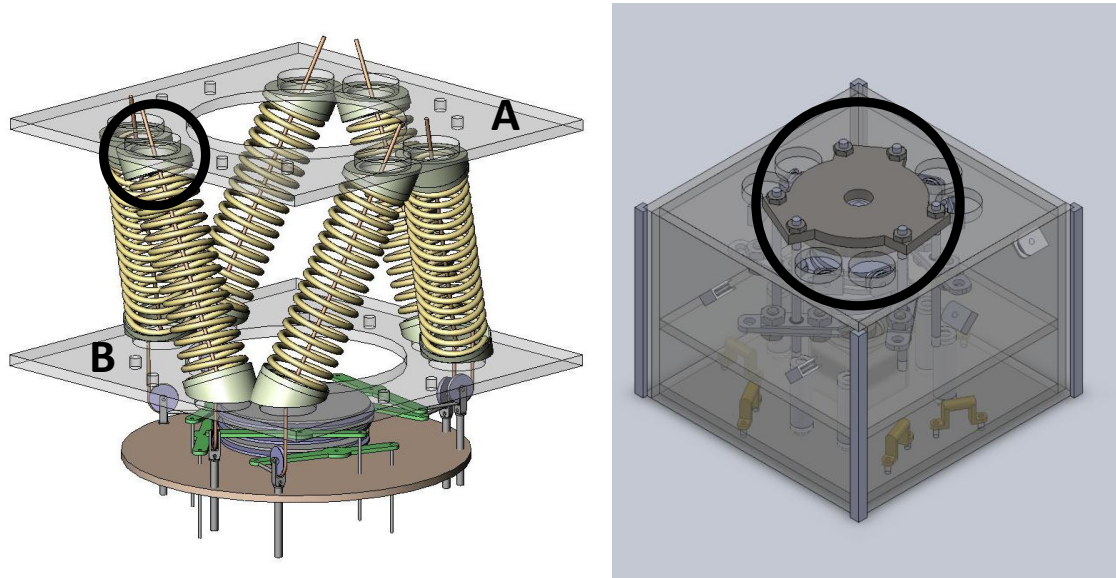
Spring Platform on Model (Left), Spring Platform with Springs (Right)
